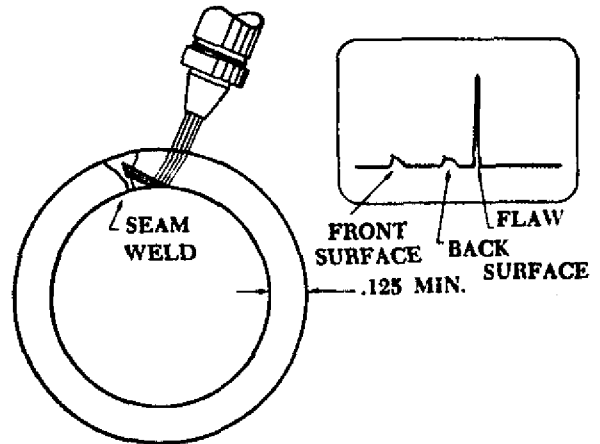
Angle beam penetrating a weld bead.
